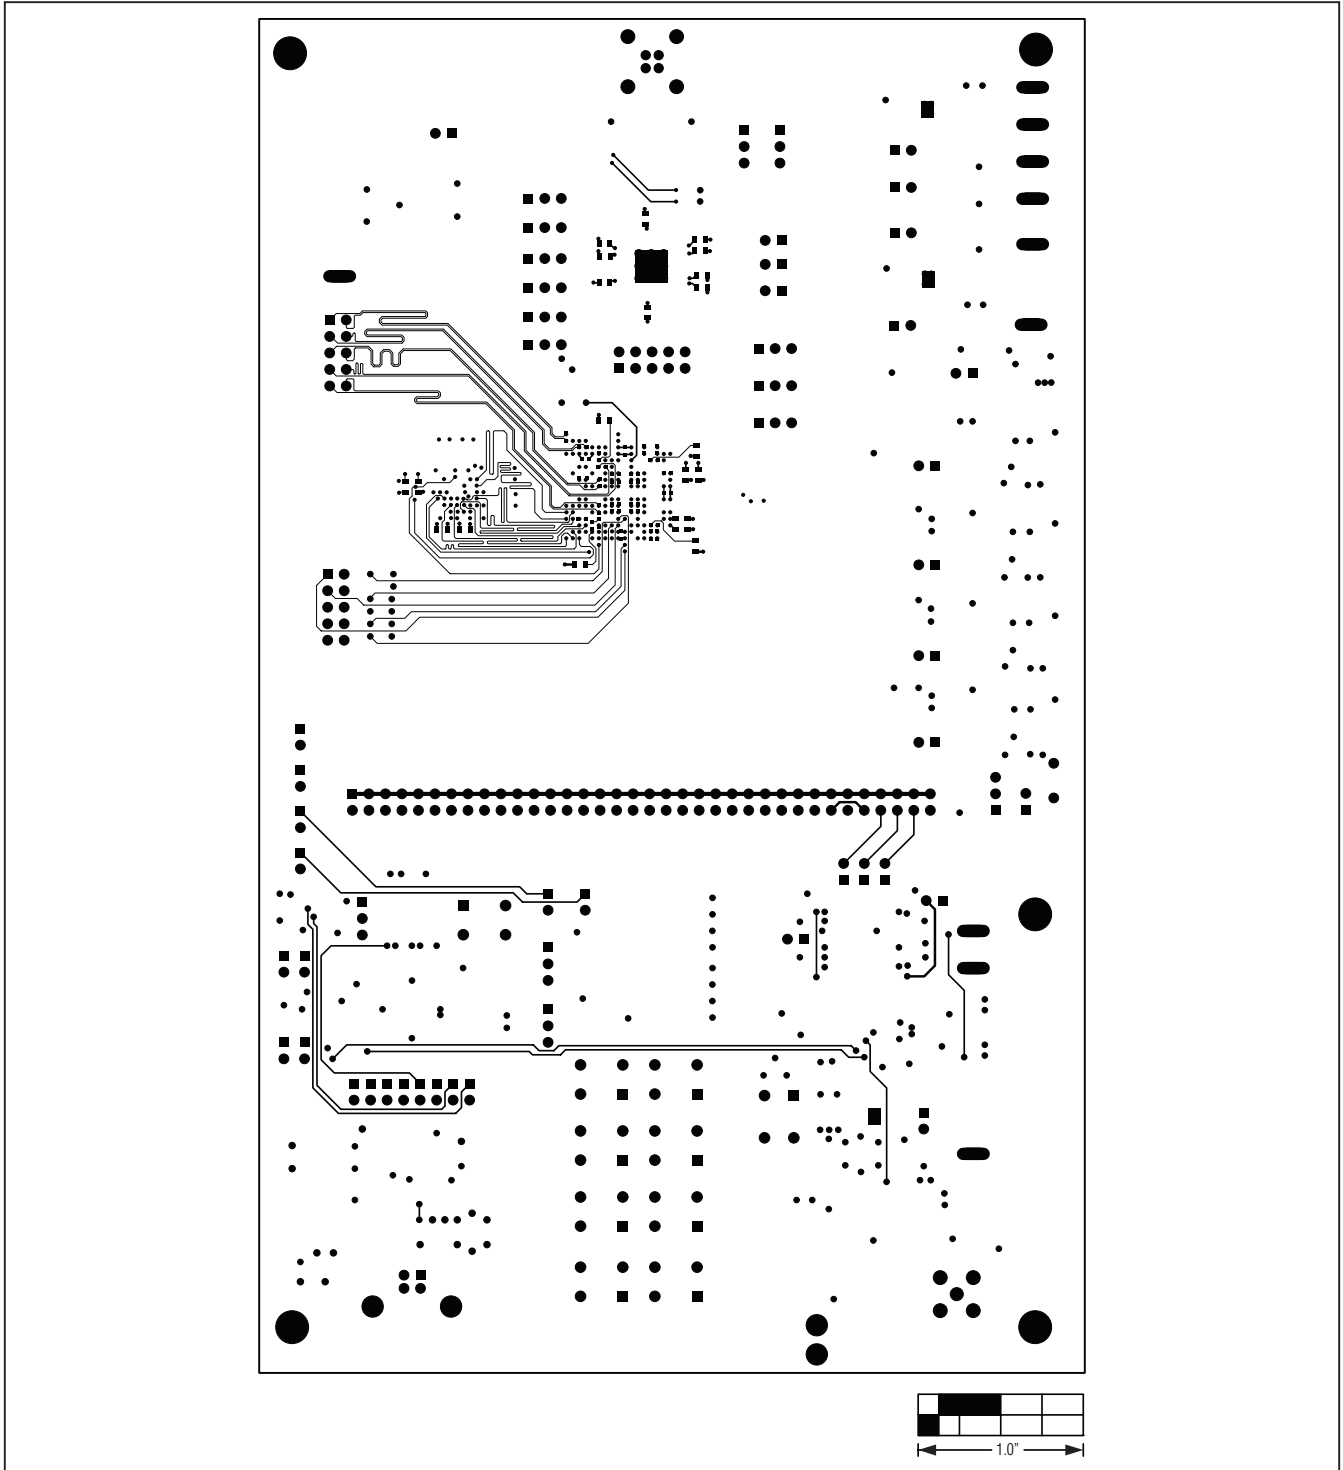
MAX9249 EV Kit PCB Layout—Solder Side
